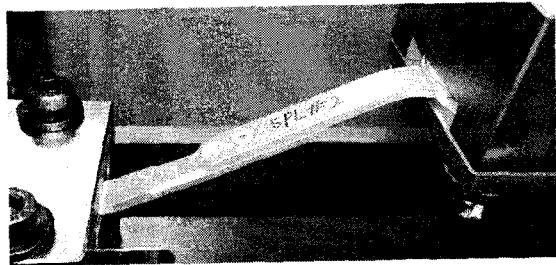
The specimen, jig for tensile and bending test (height : 60mm, speed : 3mm/min)
